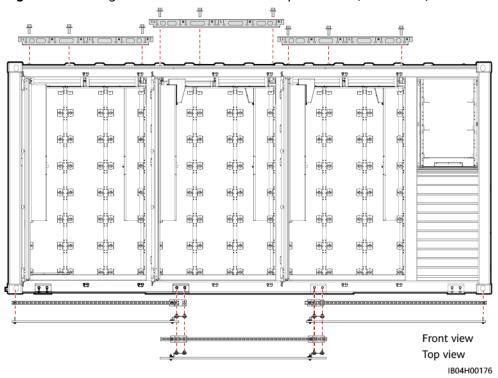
Long bottom beam installation position 2 (scenario 3)
